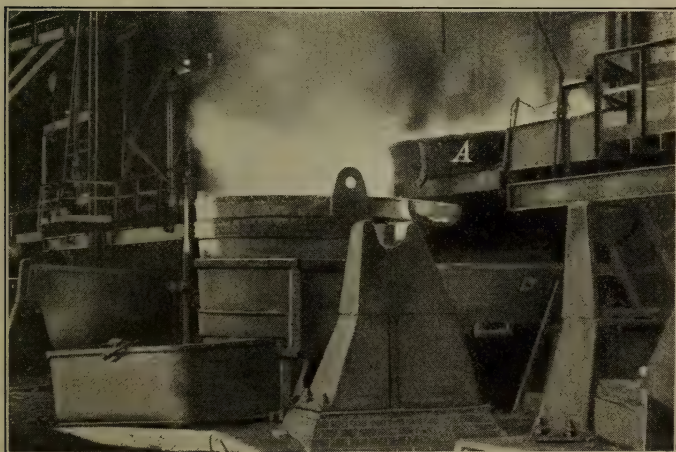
Drawing off the molten steel from an open-hearth furnace into large buckets, from which it is cast into molds
